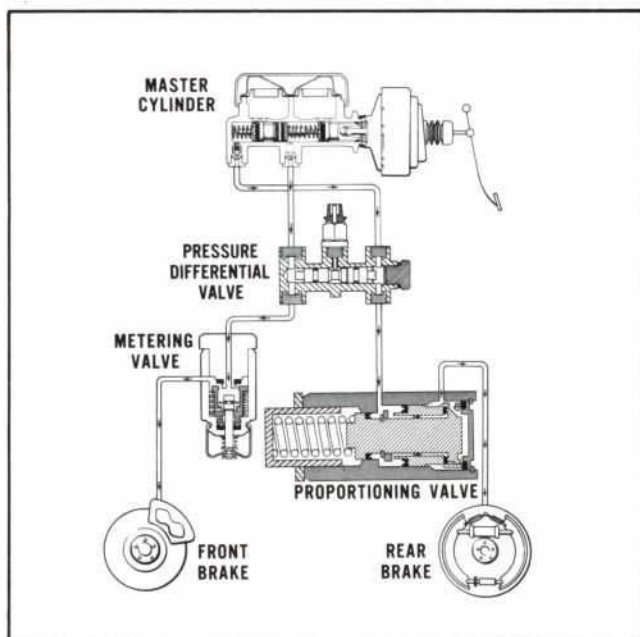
Dual Brake Master Cylinder for Disc Brakes
